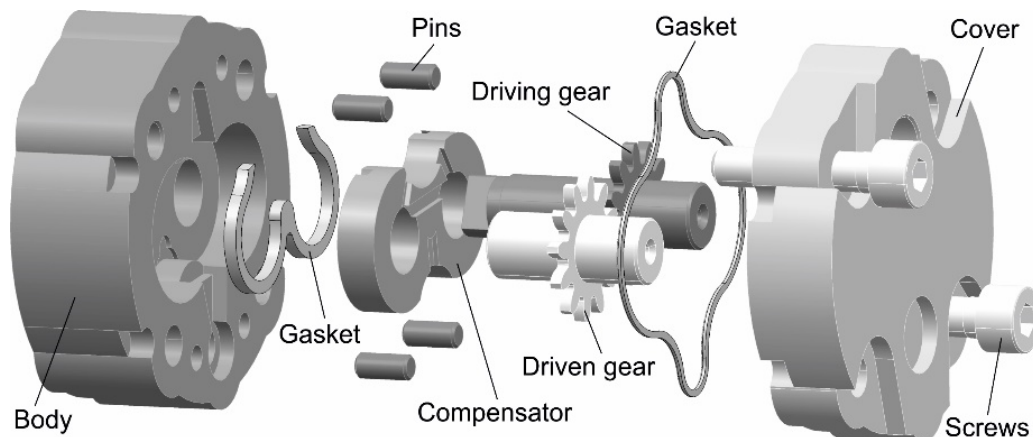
Exploded 3D view of the spur gears pump CAD model.
